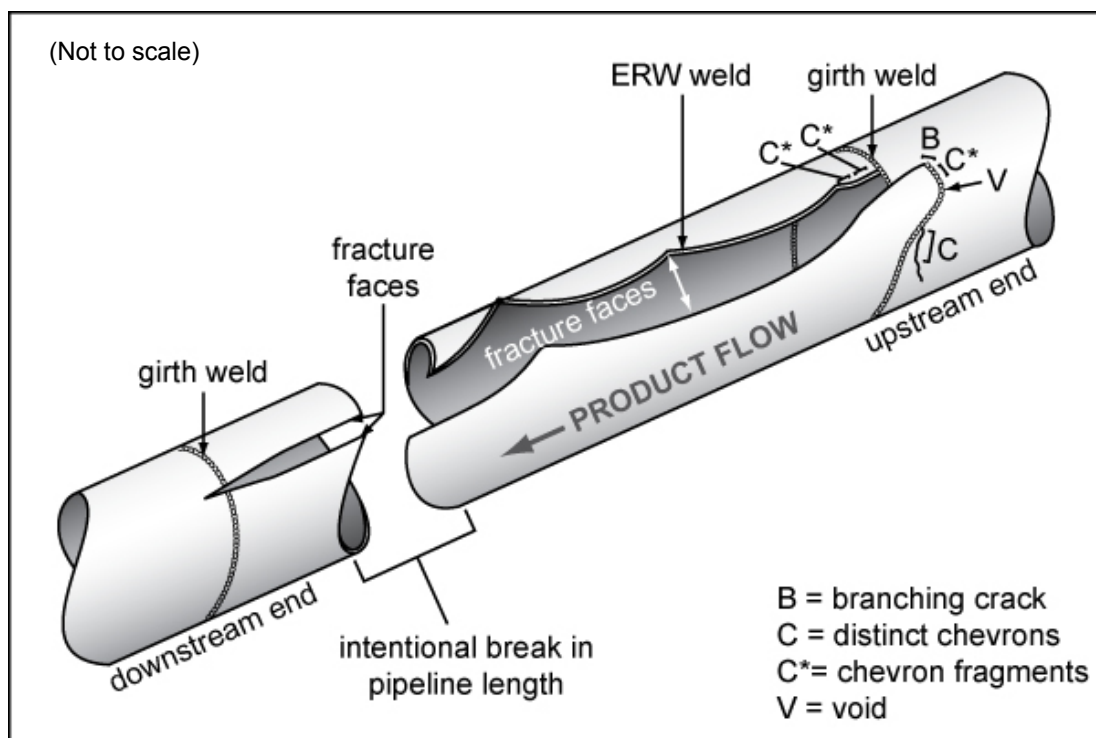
Schematic drawing of accident pipe identifying welds and showing fracture features of interest.
